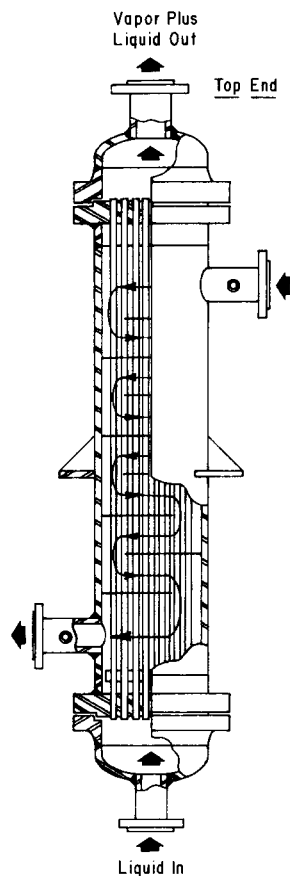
H. Fixed tubesheet, single-tube pass vertical heater or reboiler. (Used by permission: Engineers & Fabricators, Inc., Houston.)
